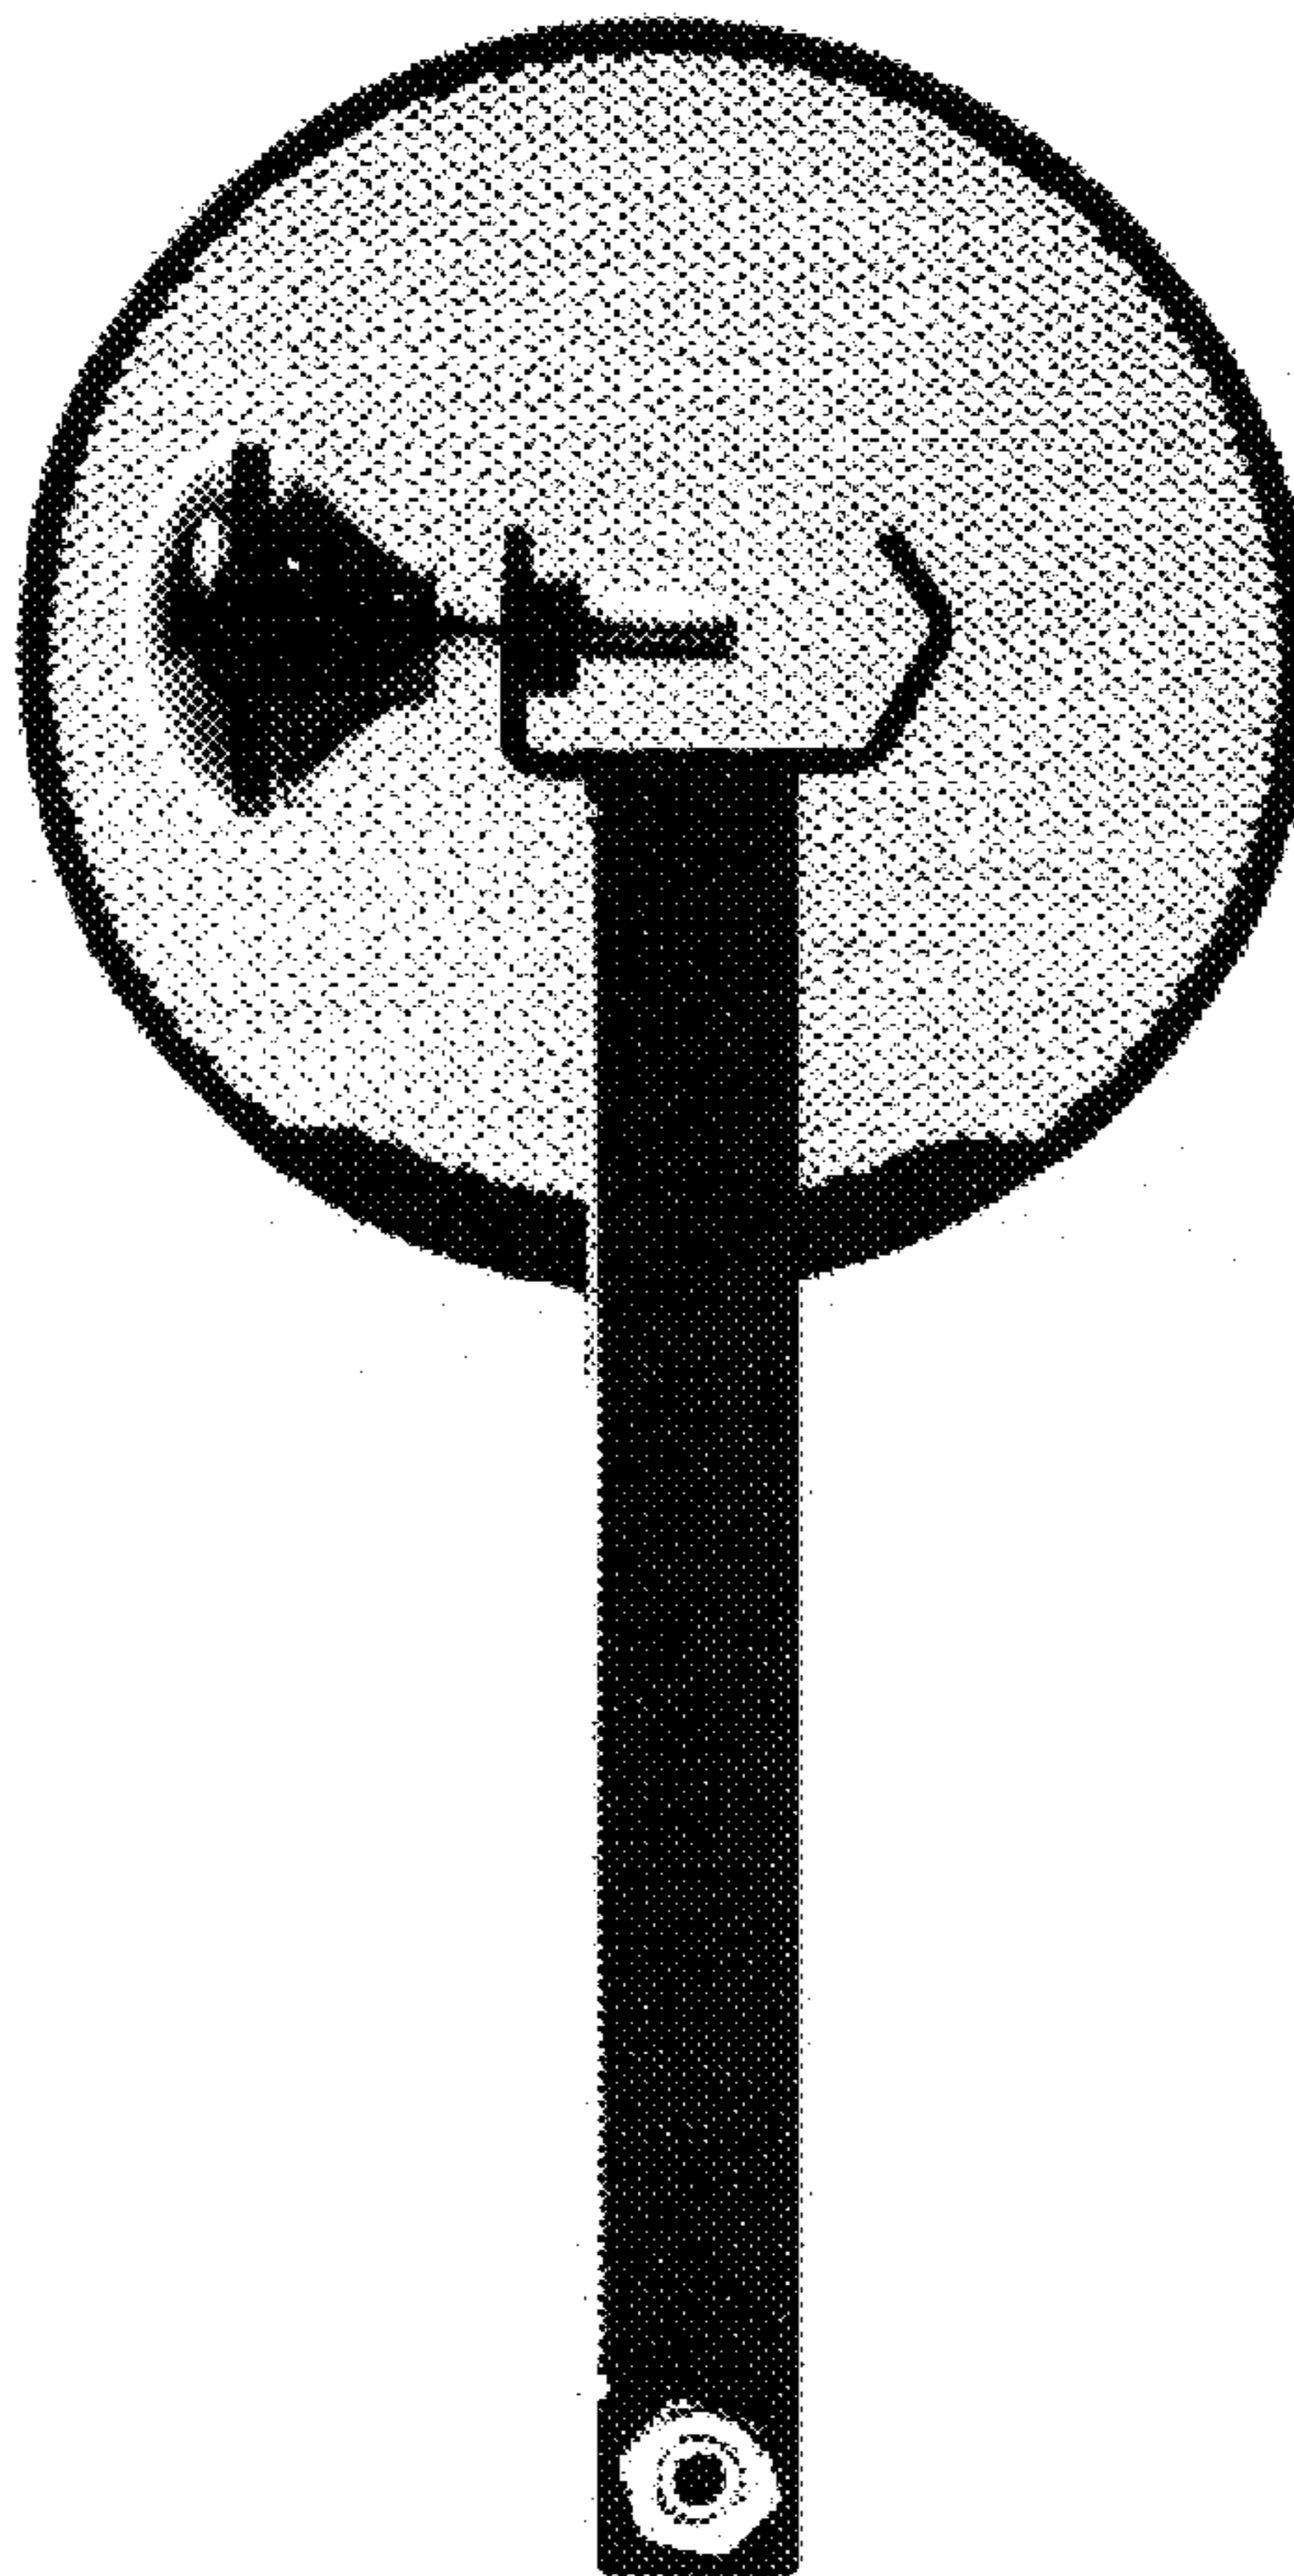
is a rear view of a pop screen filter assembly embodying my new design;
